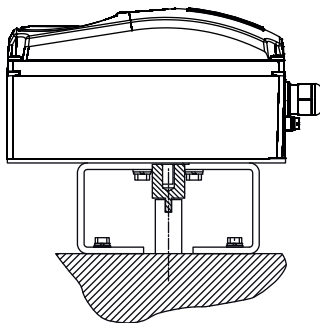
Mounting to rotary actuators in accordance with VDI/VDE 3845
